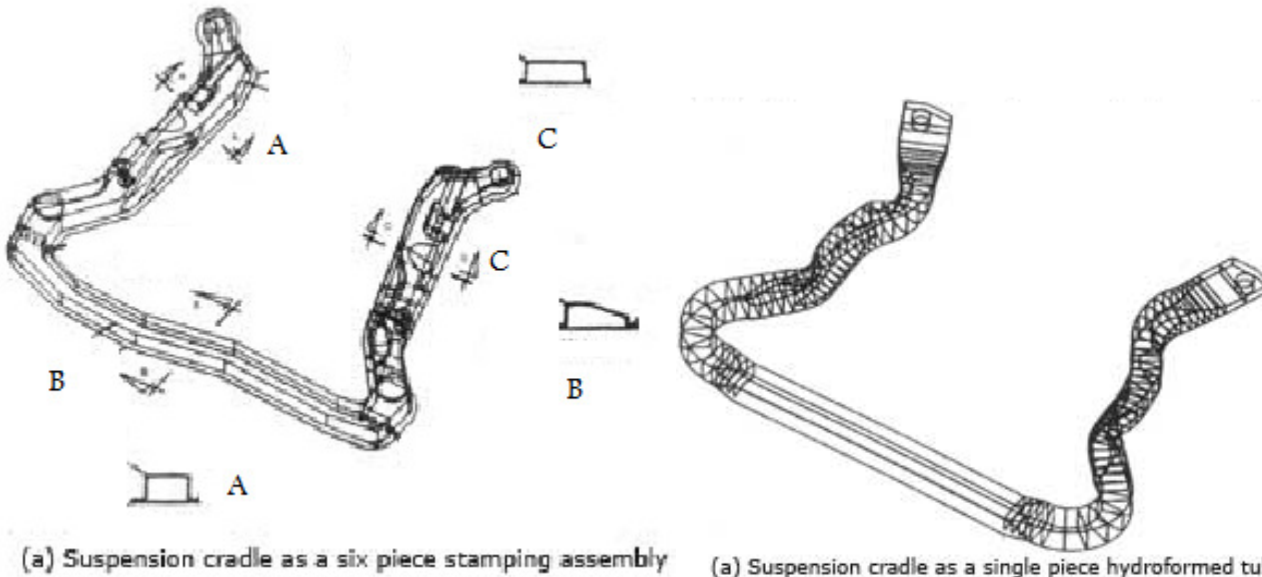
Suspension cradle with Stampings and then redesigned into a single piece by hydroforming[9]
